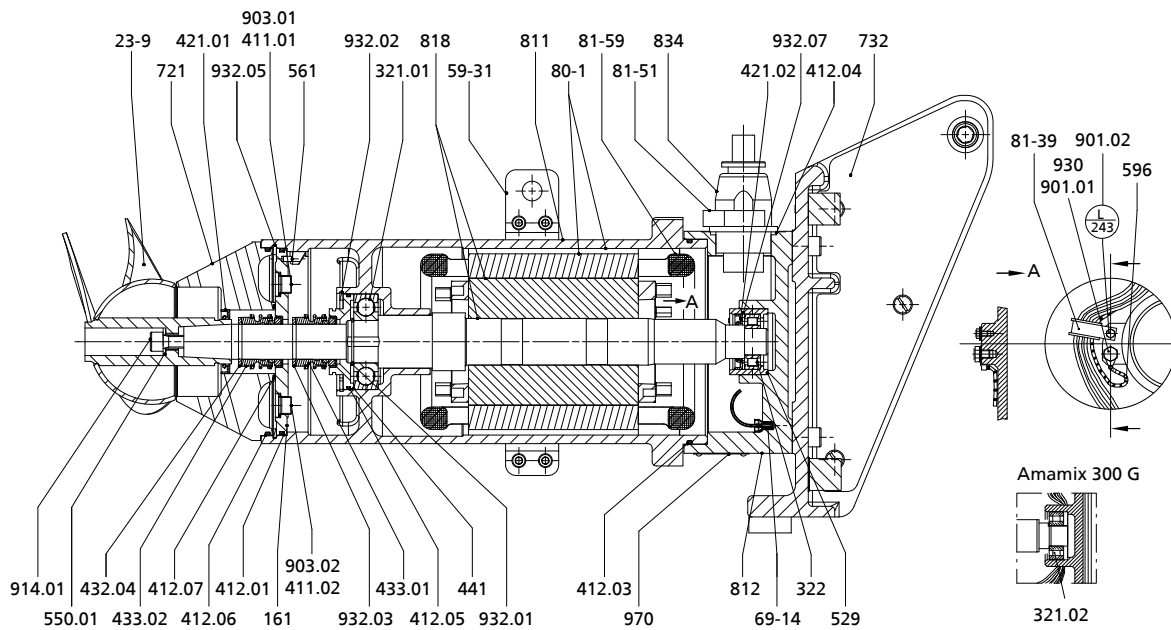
General assembly drawing of Amamix 300/400/600, motor housing material grey cast iron
